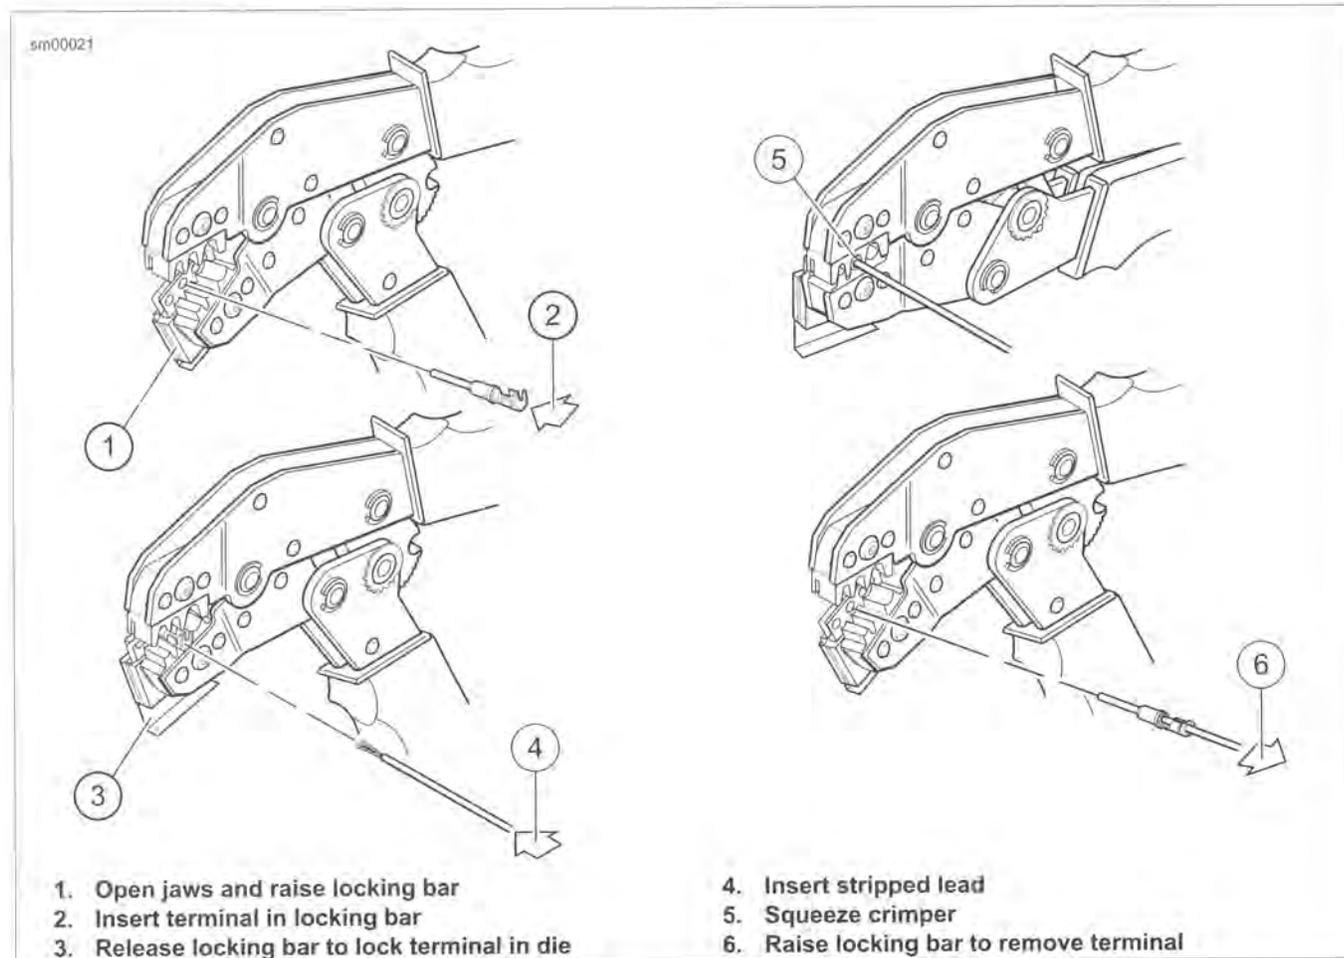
Crimping a Deutsch DT Sealed Terminal
